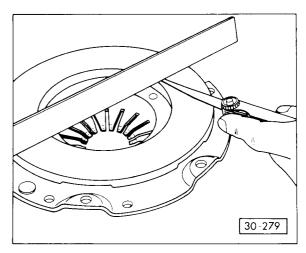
Checking the contact surface for cracks, signs of burning and distortion
